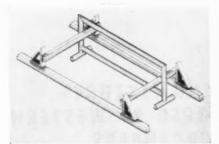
Schematic diagram of the "tooling ways." A rough picture-frame fixture is shown in line with the straight edges.
